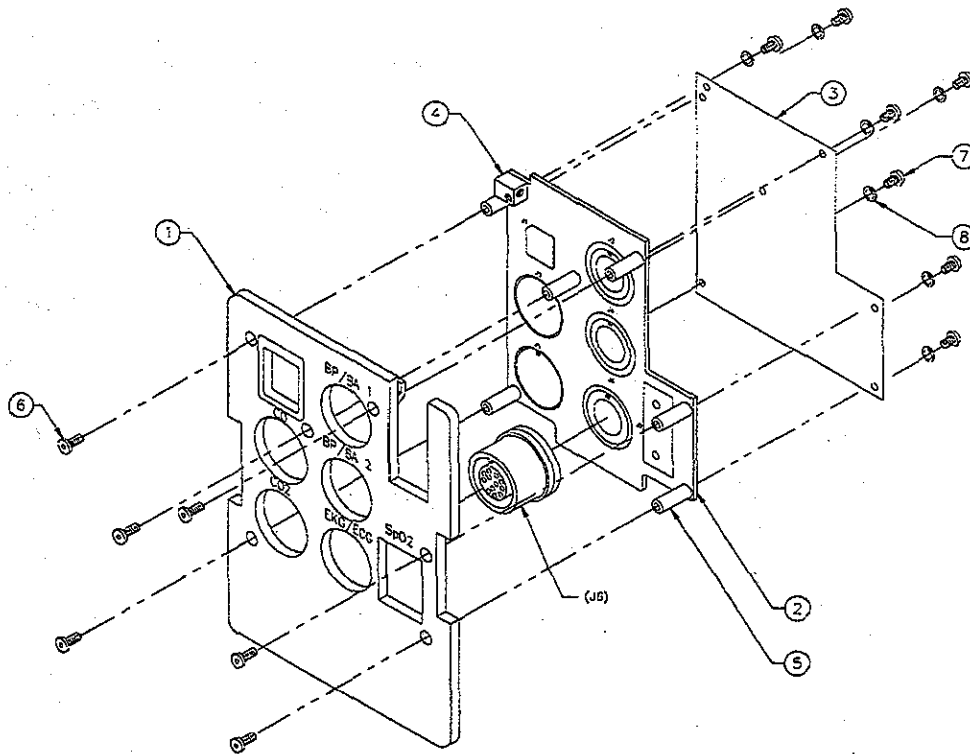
Hewlett-Packard Connector Plate Assembly
